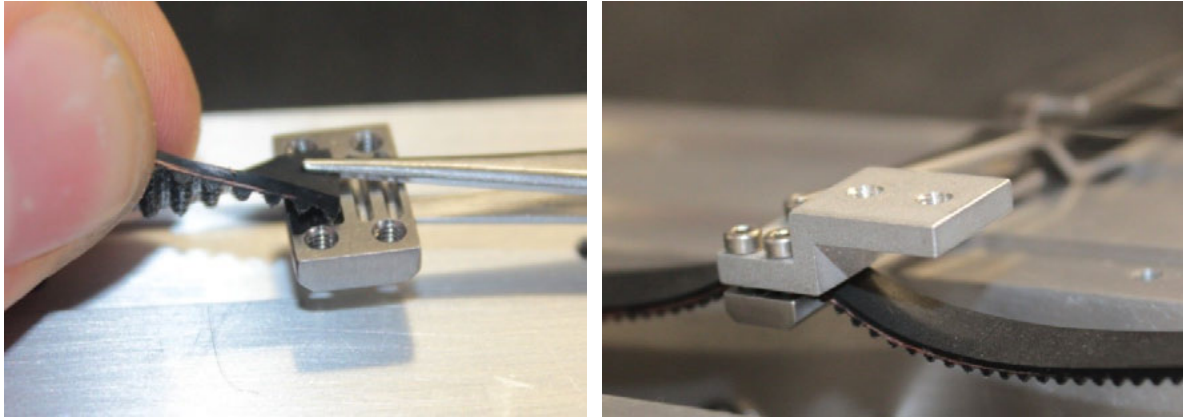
Clamping of the Drive belt Left – the belt is held in place using adhesive. Right – the clamped assembly is shown.
